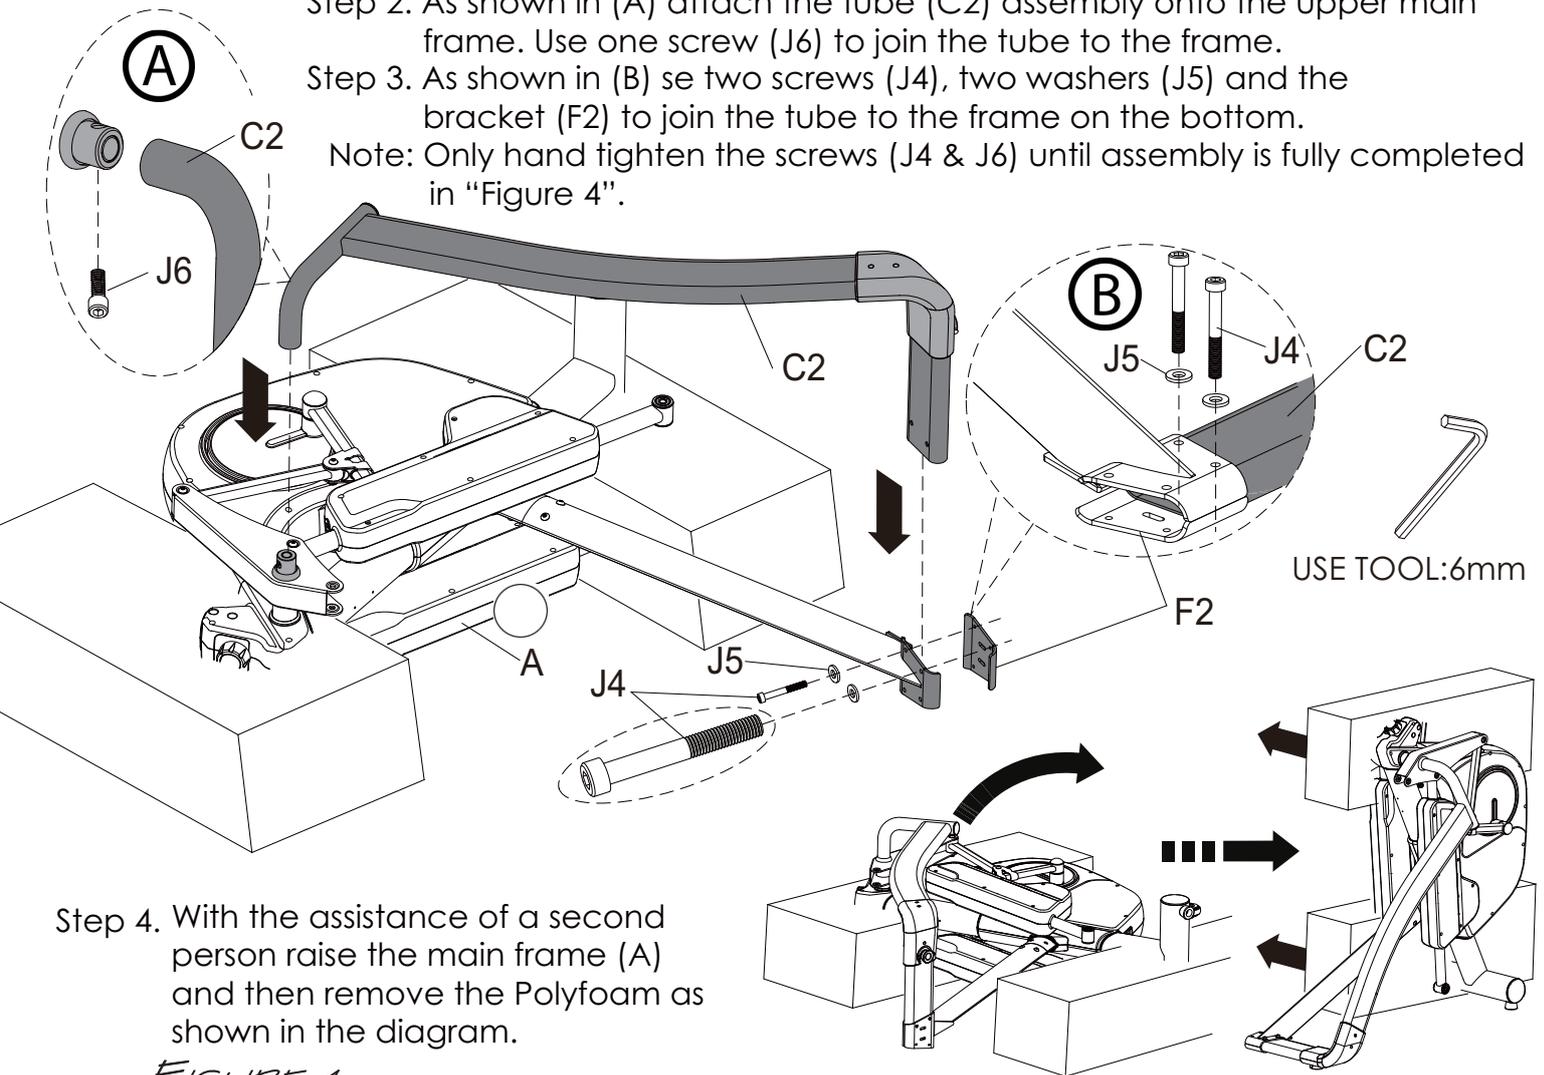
RIGHT SIDE CONNECTING TUBE ASSEMBLY
